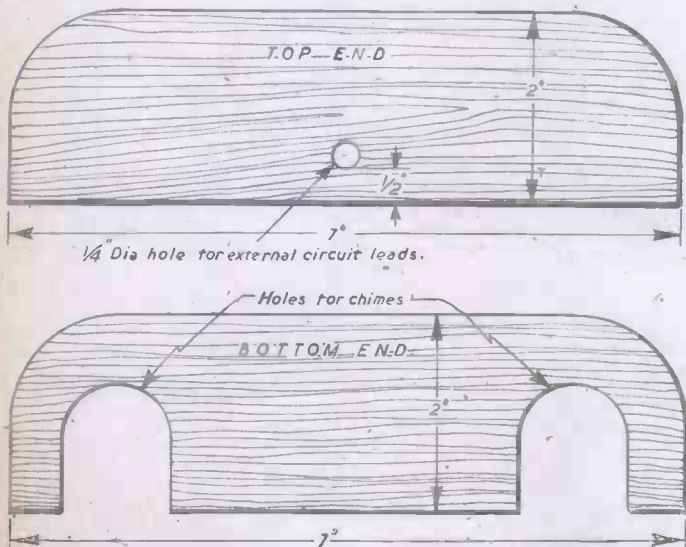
Shape and dimensions of top and bottom parts of cover.
